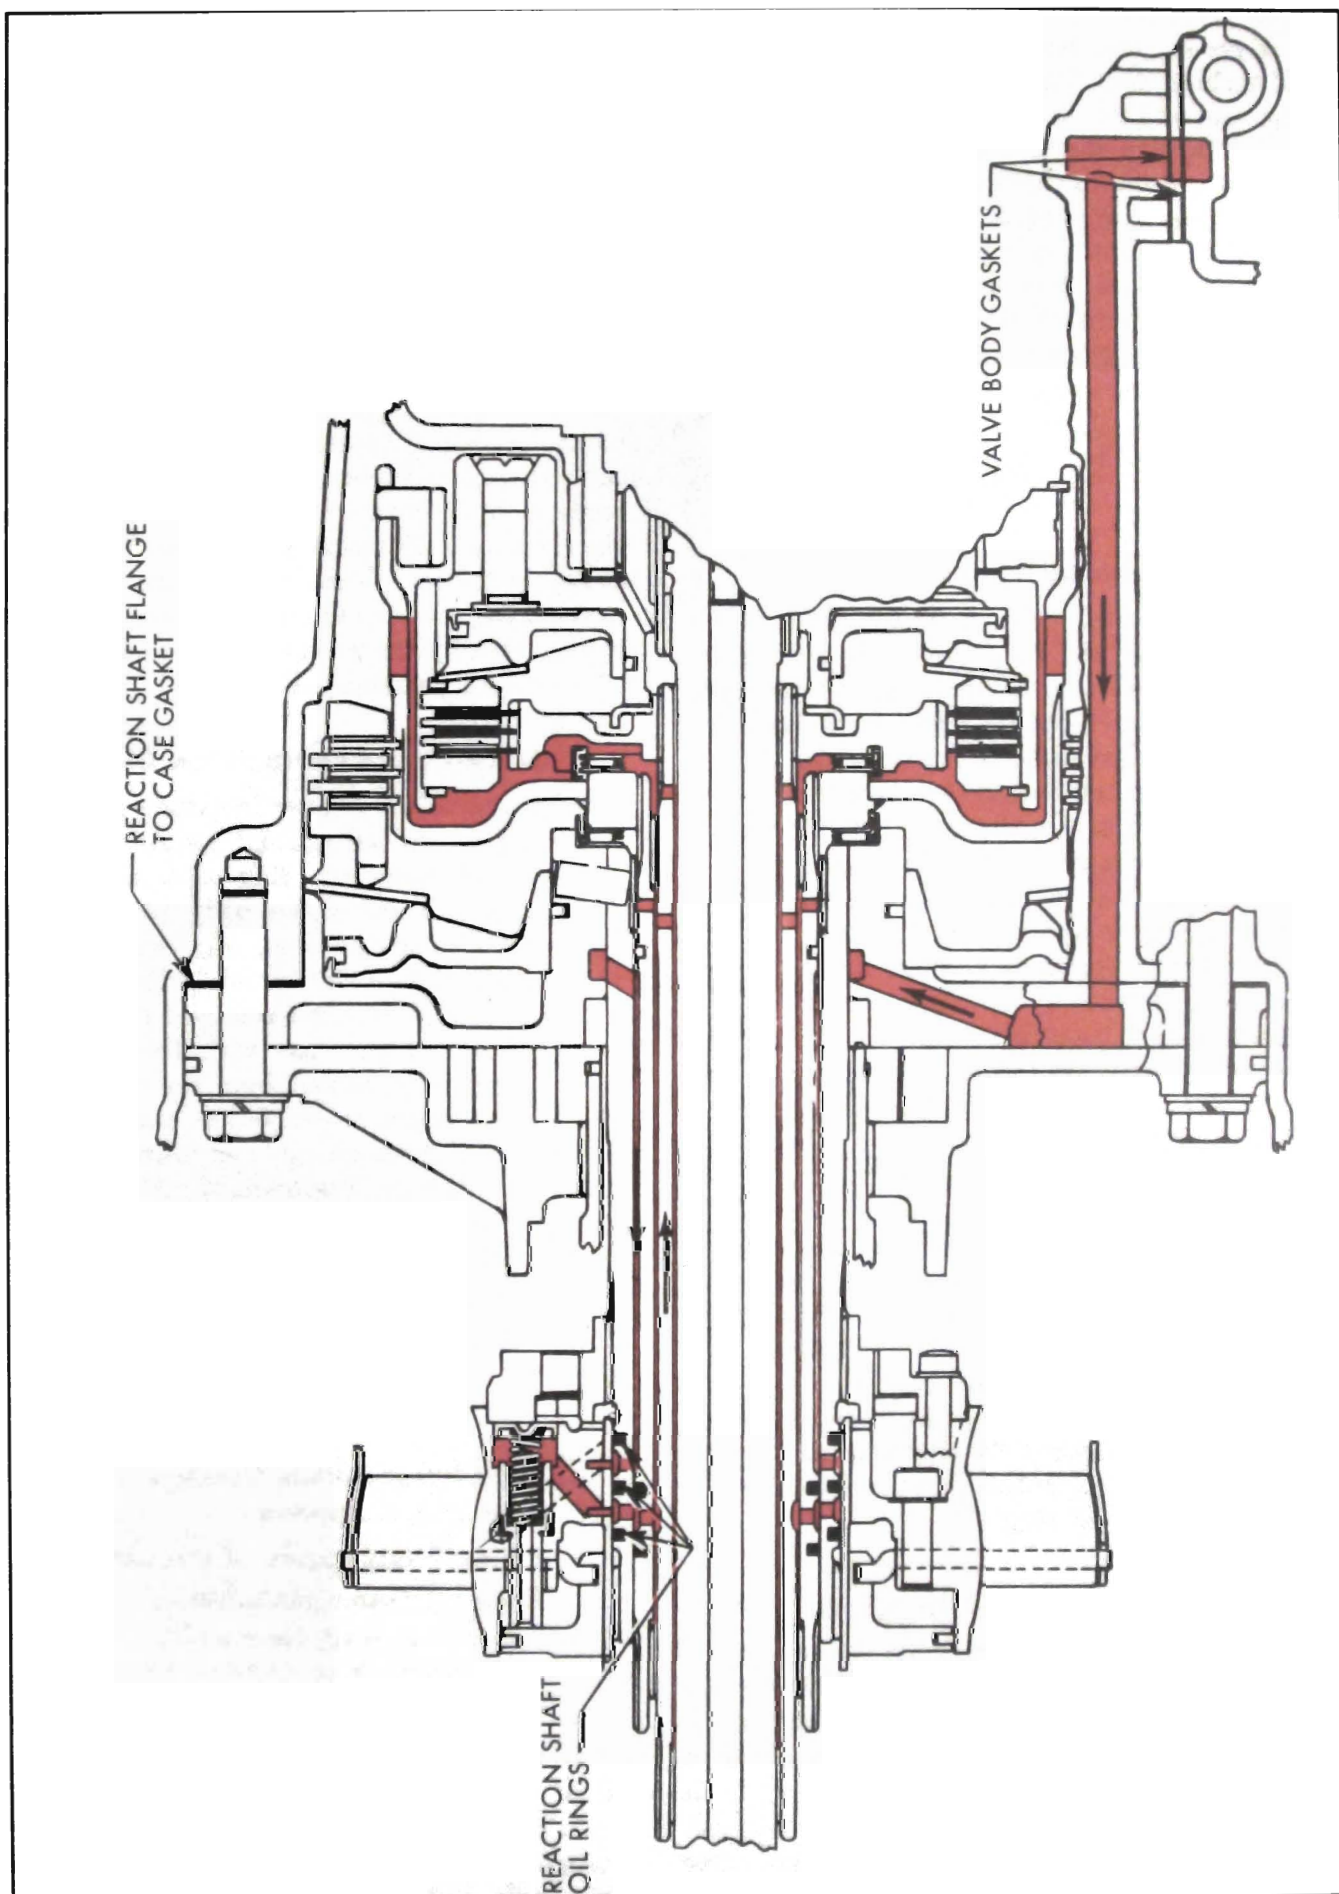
Flight Pitch Stator Valve Oil Supply and Exhaust
